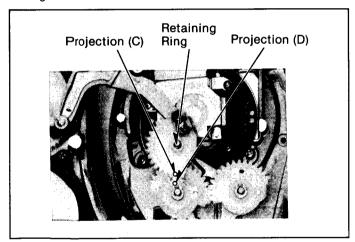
Assembly and Adjustment of Gears and Rod-(4)
